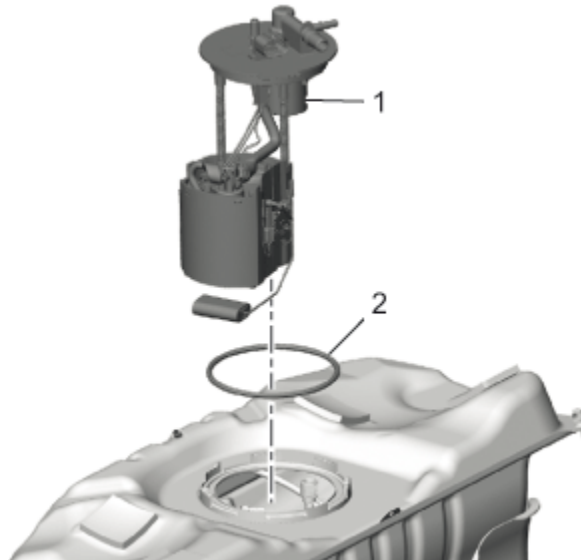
Fuel Tank Fuel Pump Module And Seal
